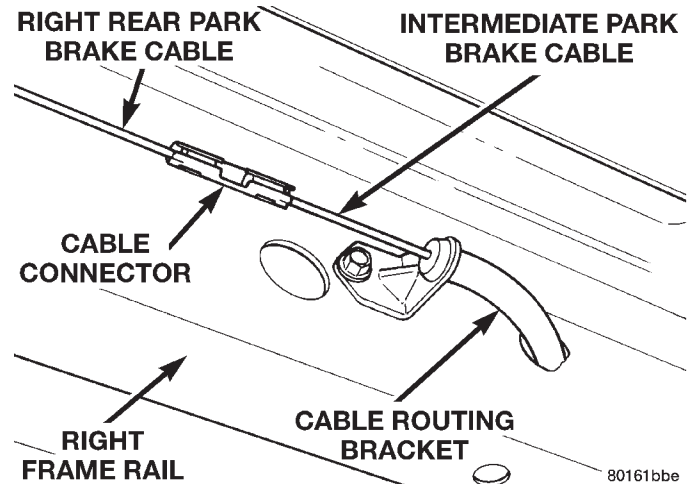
Intermediate Cable Attachment To Right Rear Cable
